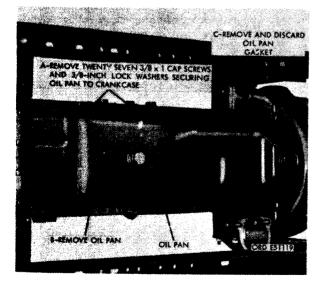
REMOVING OR INSTALLING ENGINE OIL PAN.
